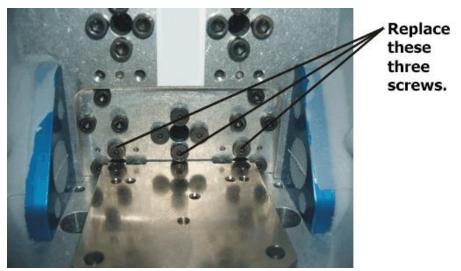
Replace #10-32 x 1/2 long low head socket cap screws
